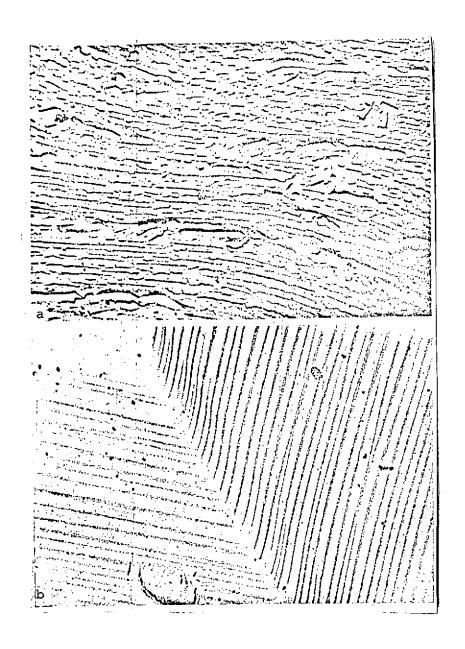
Photograph of fracture surface of nonalloyed molybdenum (a) and of the alloy Mo-0.1 atom % Co (b).
